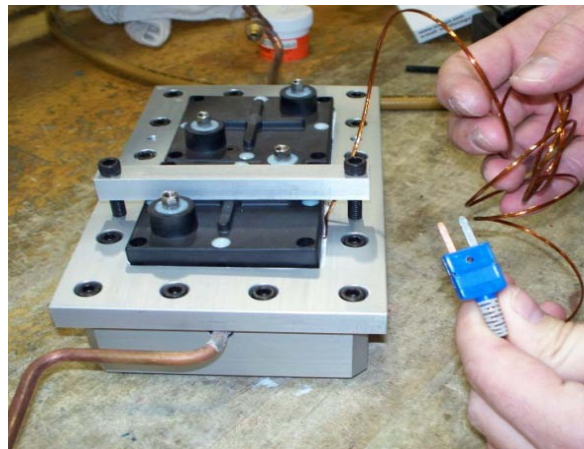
Assembled cold plate housing with heaters and thermocouple
